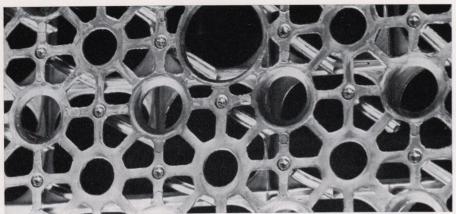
Because extrusions permit changes of cross section, they can be "tailored" more readily than roll-formed sheet sections to meet specific design requirements. Bosses, ribs, flutes can be obtained easily.
